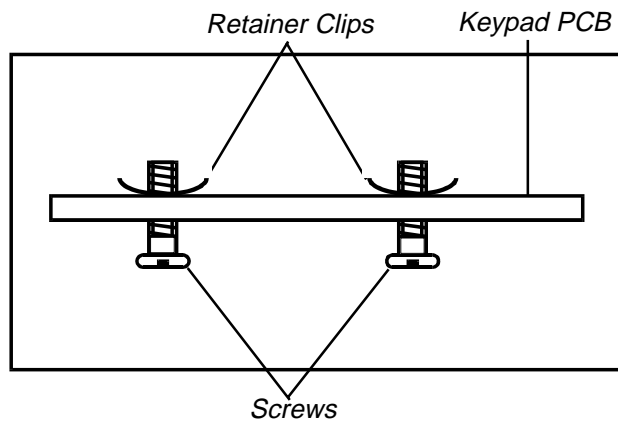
Retainer Clips Installed on Bottom Keypad Mounting Screws.
